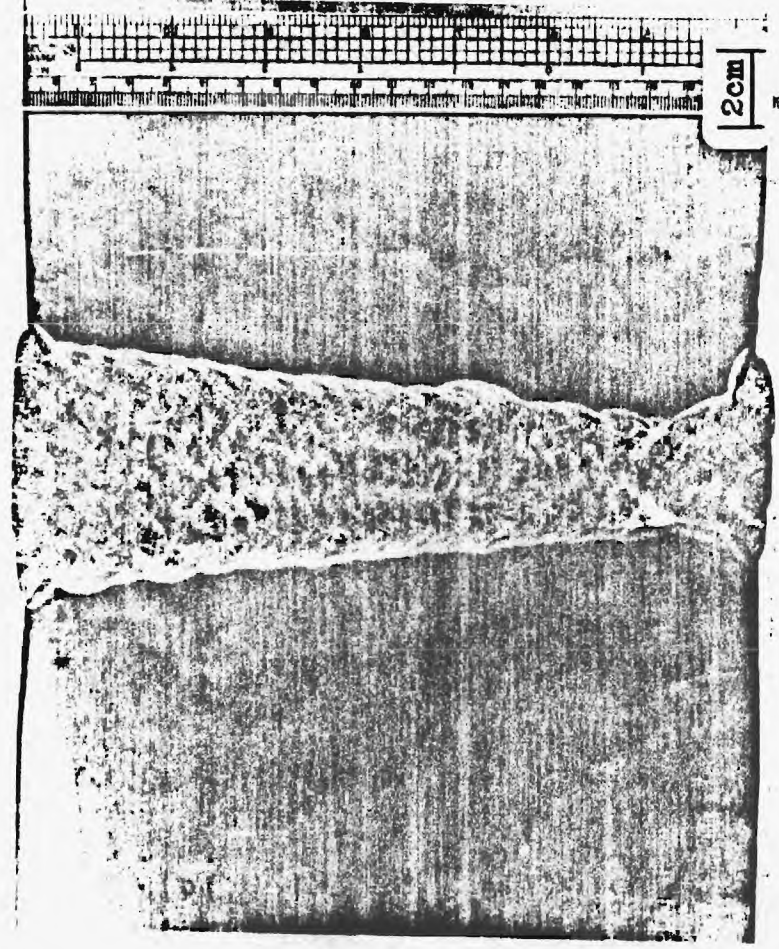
Macrograph of complete weld in 203mm thick plate
